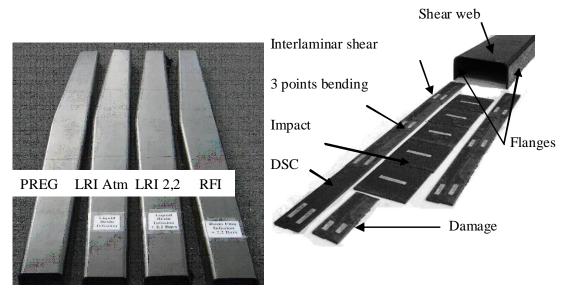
Wing spars and sample coupon machining for mechanical testing.
